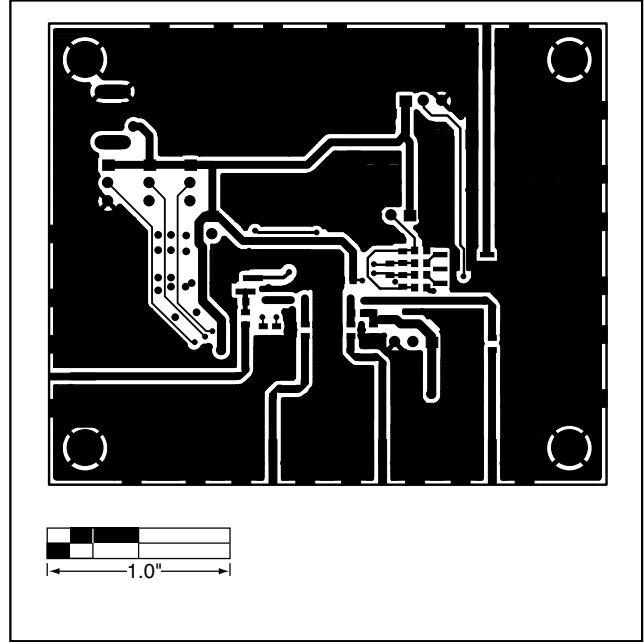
MAX2320/21/22/24/26/27 EV Kits PC Board Layout—Solder Side
